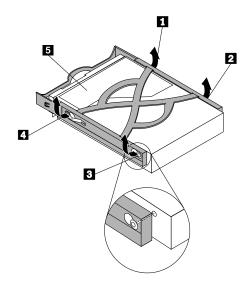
Installing a 3.5-inch hard disk drive into the bracket
